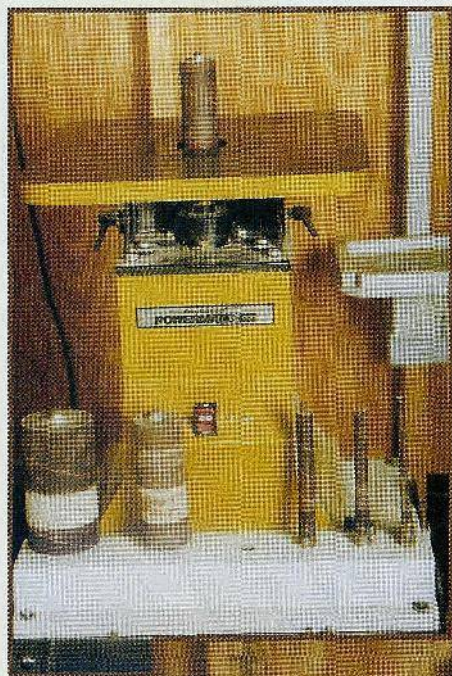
An oscillating spindle sander is used for edge sanding, ensuring a 90° cut.
